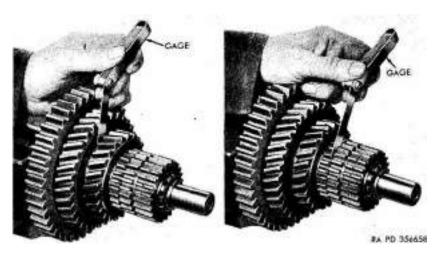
Checking end play of second speed and third speed gears with thickness gage.
